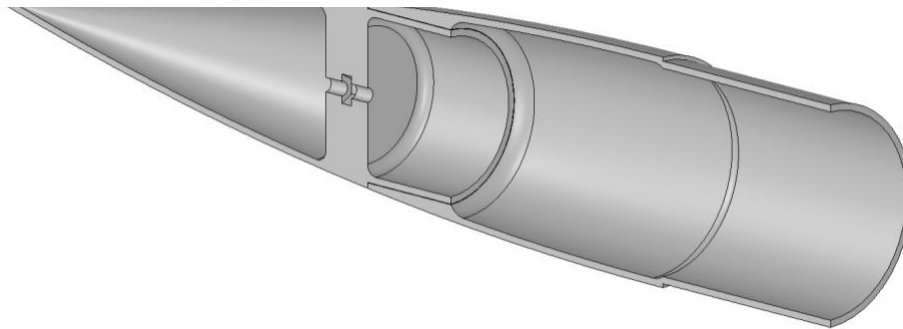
Assembly of the upper and lower nose cone with built-in couplers.
